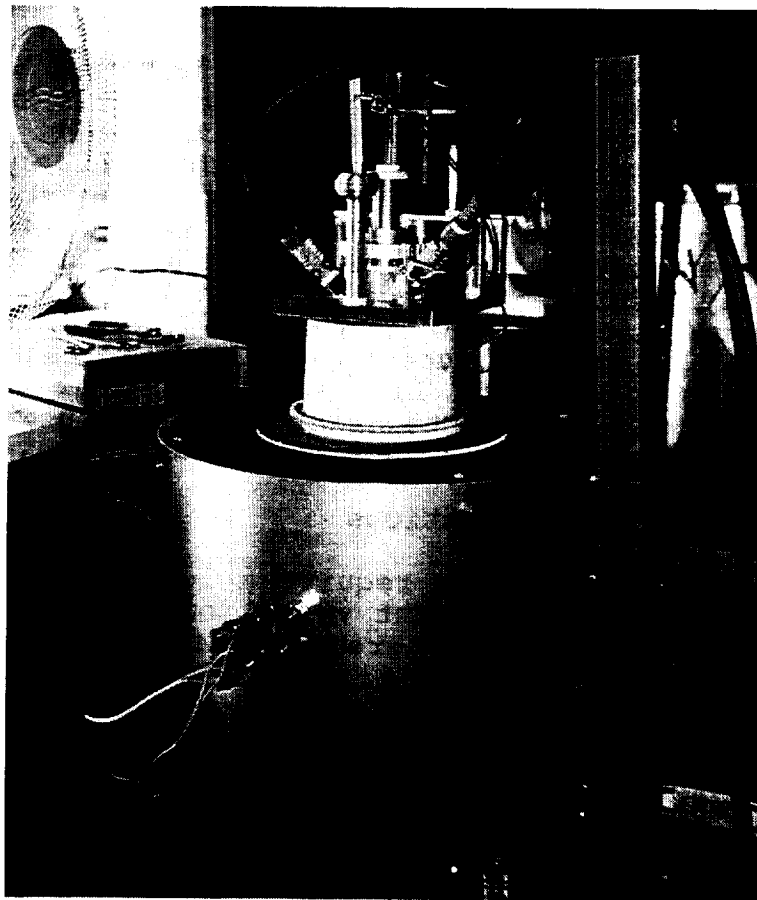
View of Fixture for Argon Purging, Part Suspension, Cathode Rotation, and Electrical Input for Fused Salt Plating.
